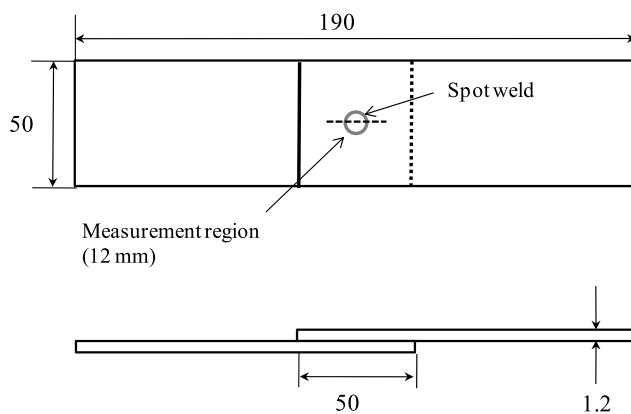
Shape and dimensions of the spot welded specimen; scanning area is 12 mm with a 2 mm step
